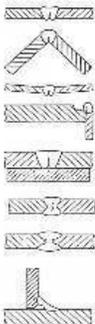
The arrangement of root pass assurance when welding of receptive materials
